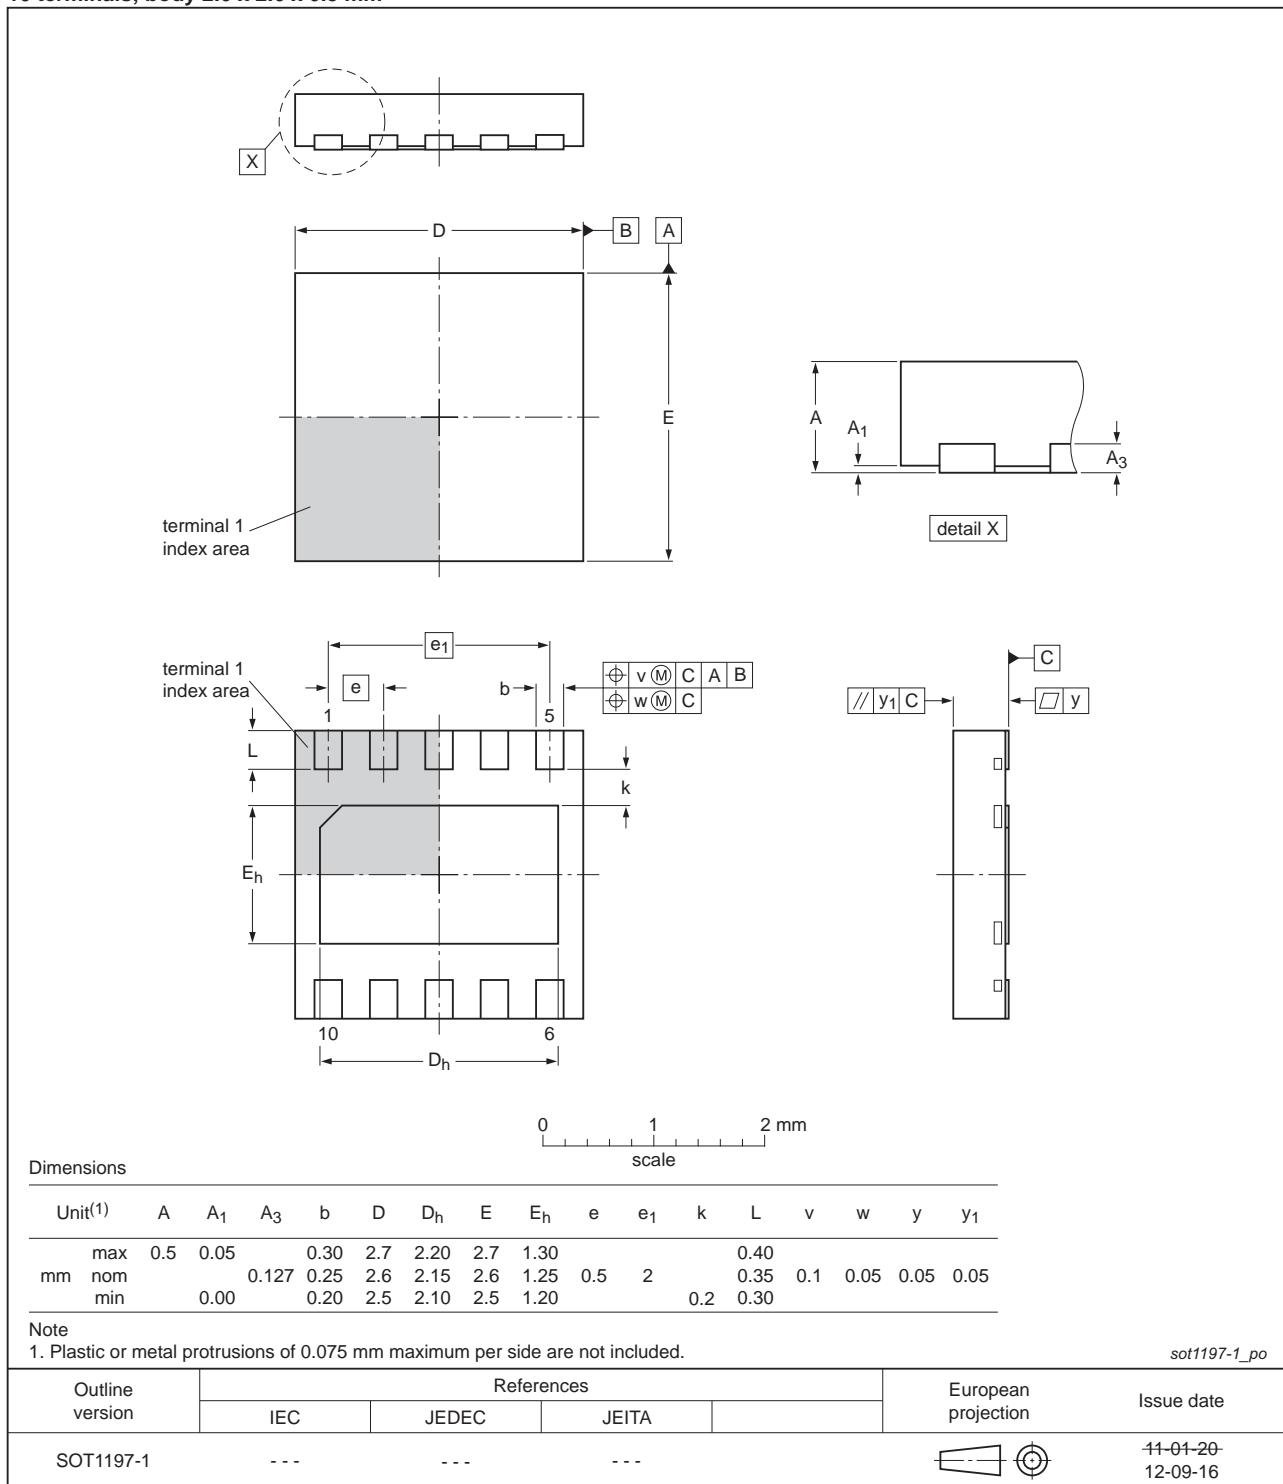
Package outline SOT1197-1 (HXSON10) of PCF85063BTL
